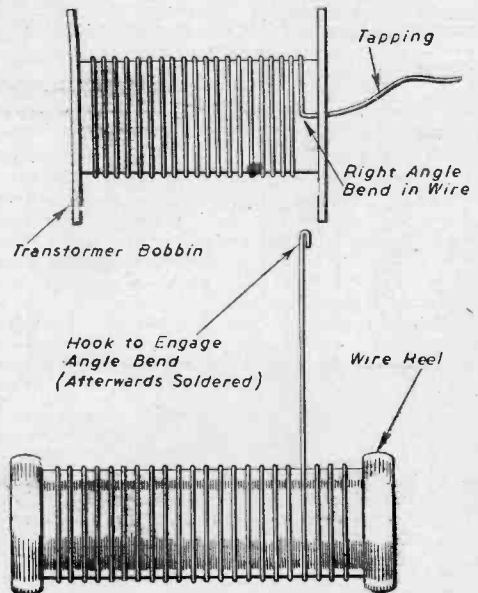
Method of making a tapping when using heavy gauge wire.
